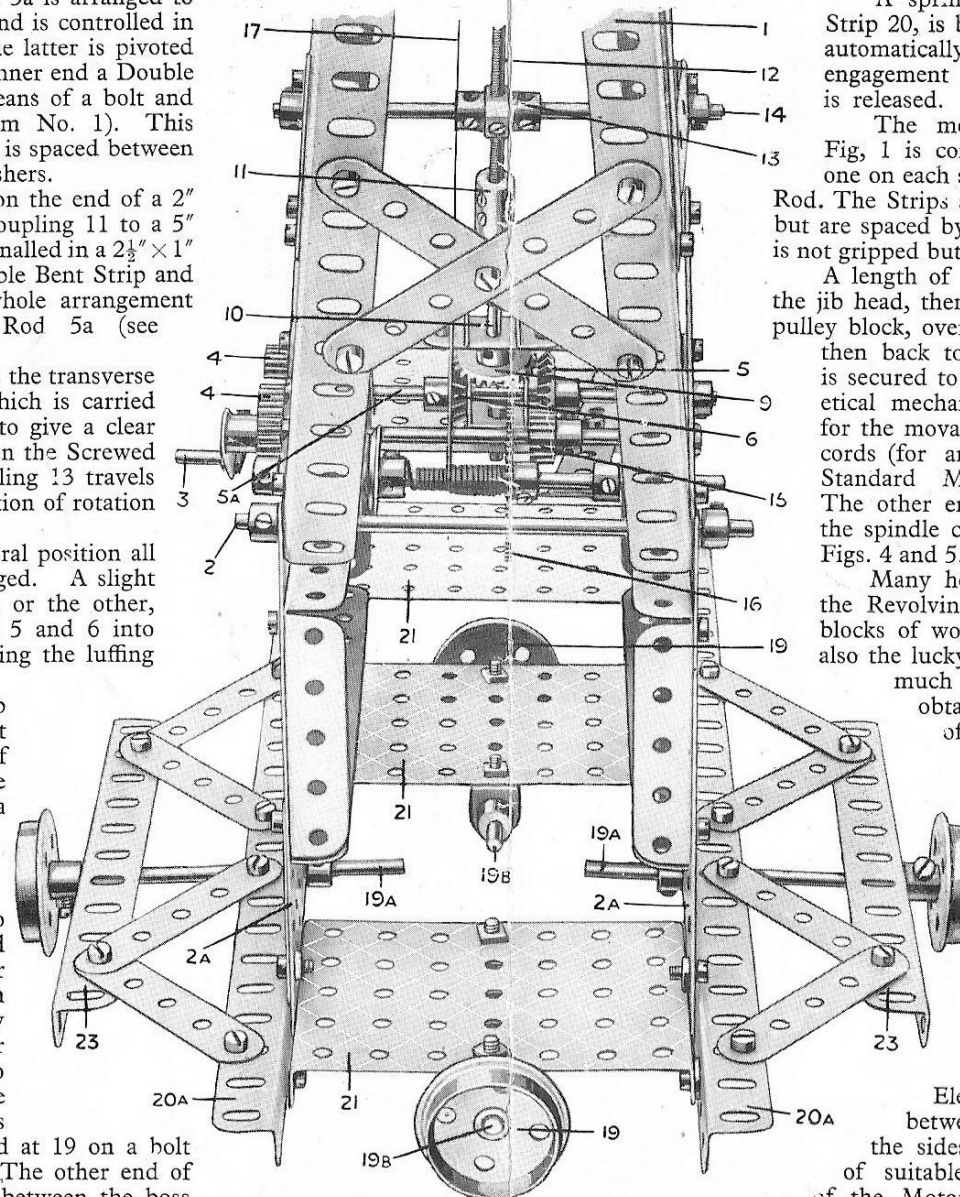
Front view of Crane, showing hoisting mechanism, etc.
